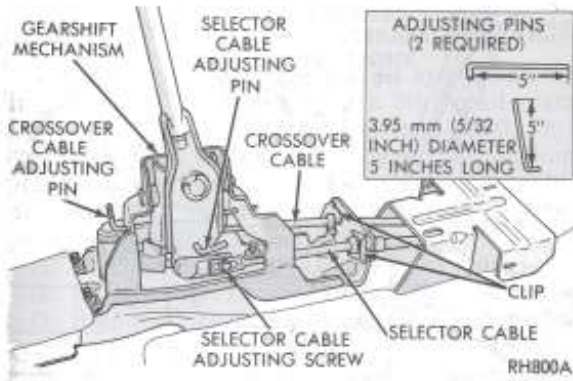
Make Cable Adjusting Pins (2) as Shown (H-Body)
